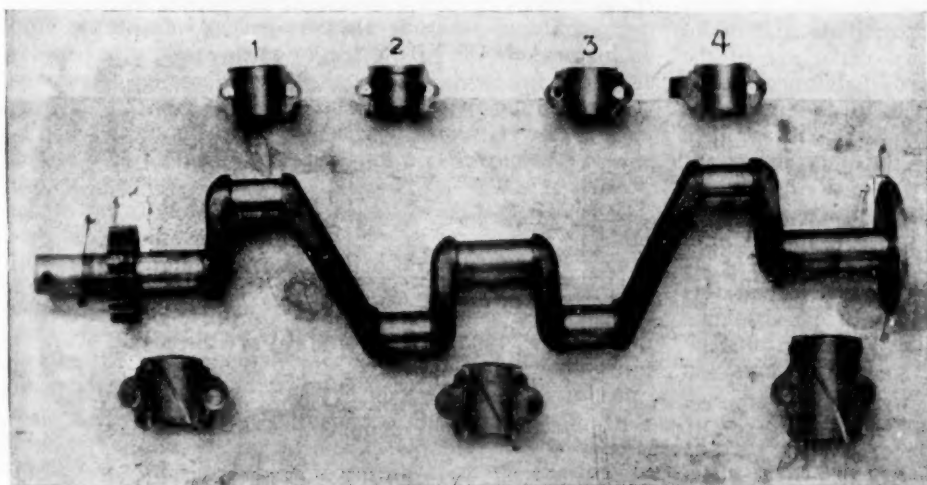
CRANK PINS AND MAIN BEARING OF AN AUTOMOBILE AFTER 20,000 MILES SERVICE. Connecting rod bearings equipped with Genelite. The main bearings showed decided wear, while the crank pins were barely polished and the connecting rod bearings had not come to a full seat.
